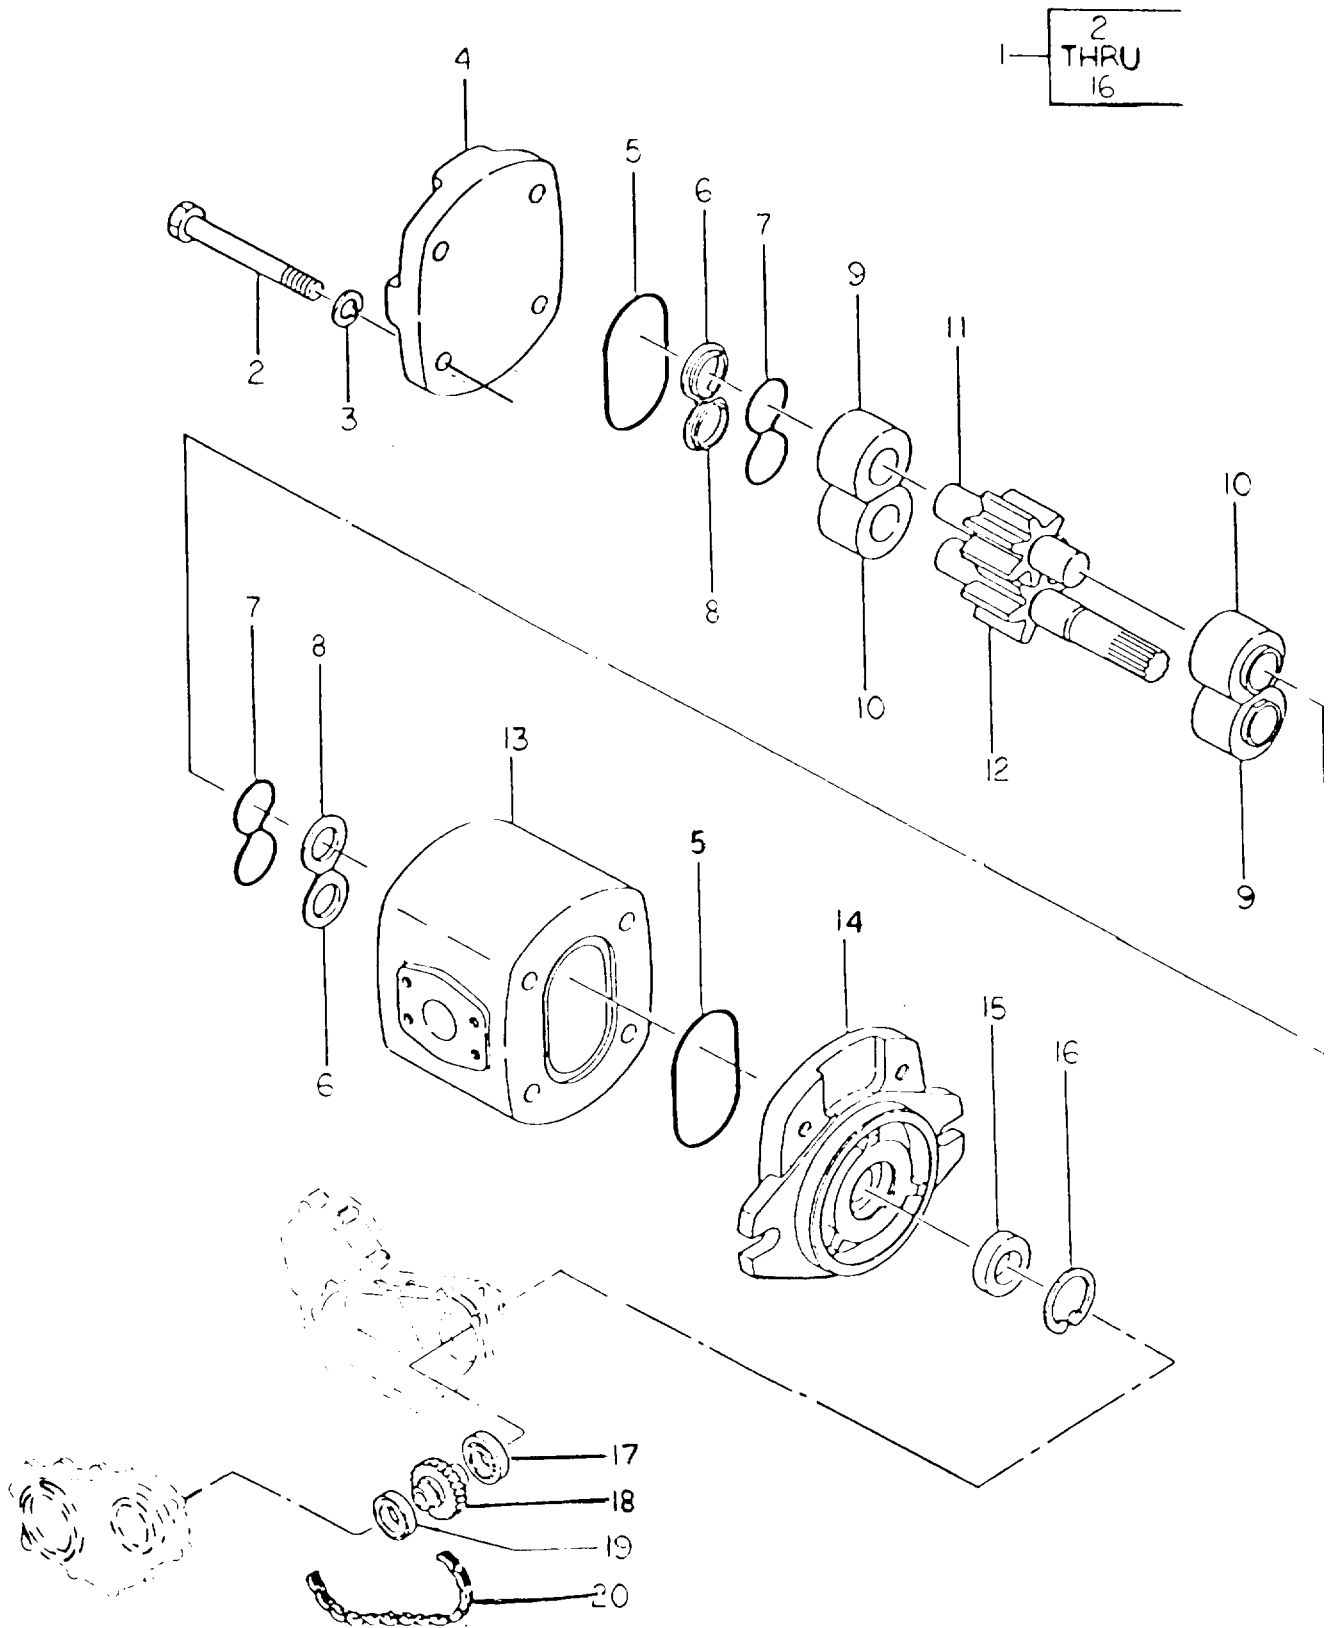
HYDRAULIC OIL PUMP ASSEMBLY
